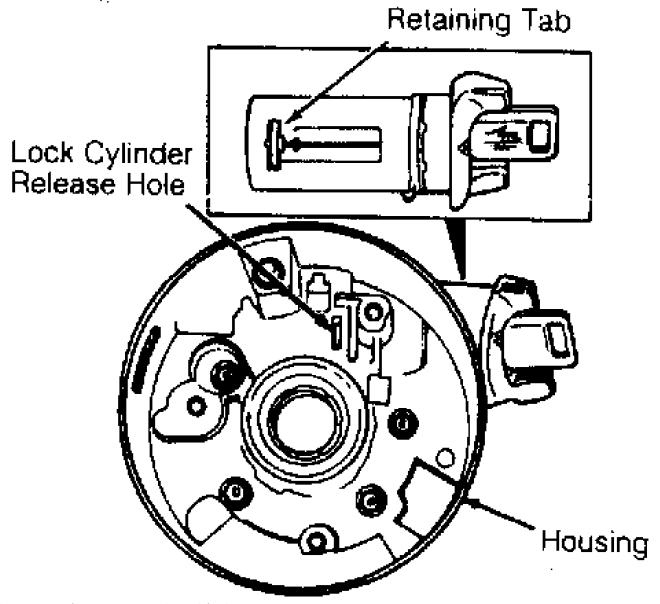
Removing Jeep Lock Cylinder Courtesy of Chrysler Motors
